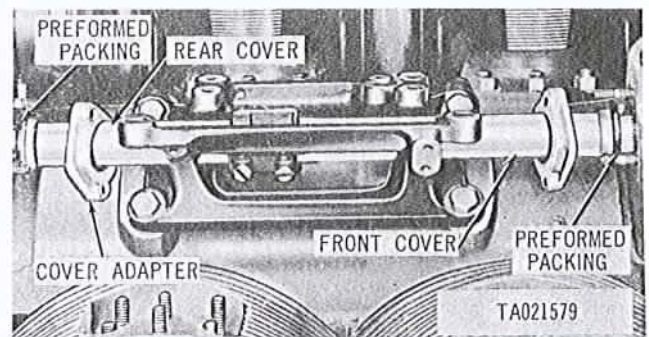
Disconnecting or connecting front and rear fan drive covers.
